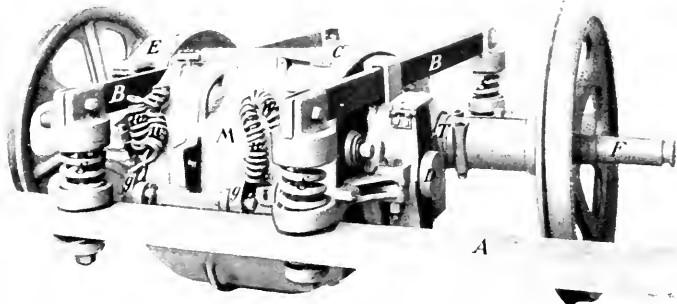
EXTERNAL VIEW OF ELECTRIC RAILWAY MOTOR MOUNTED UPON CAR-WHEEL AXLE.
